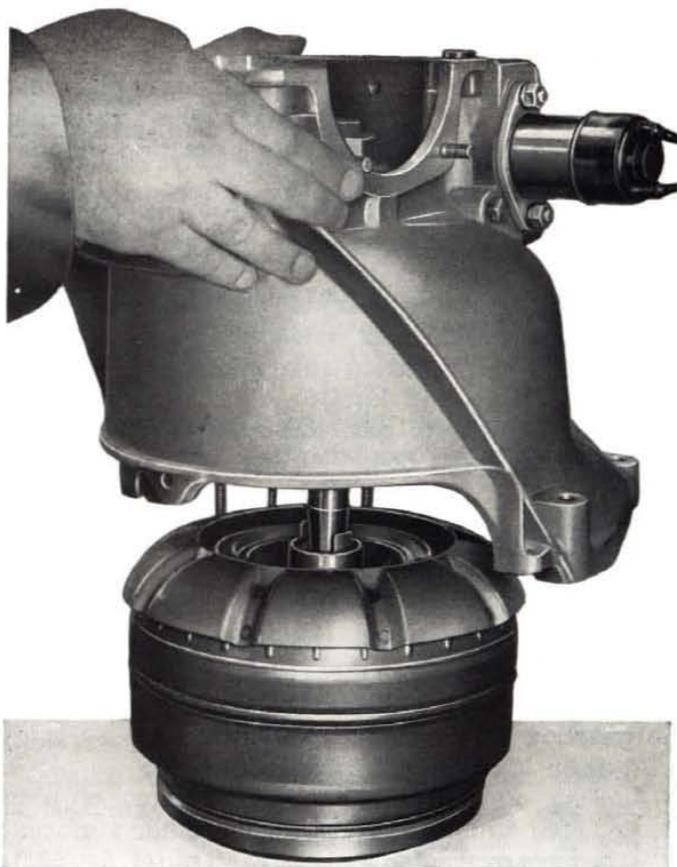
Fitting Idroconvert transmission casing onto torque converter.
